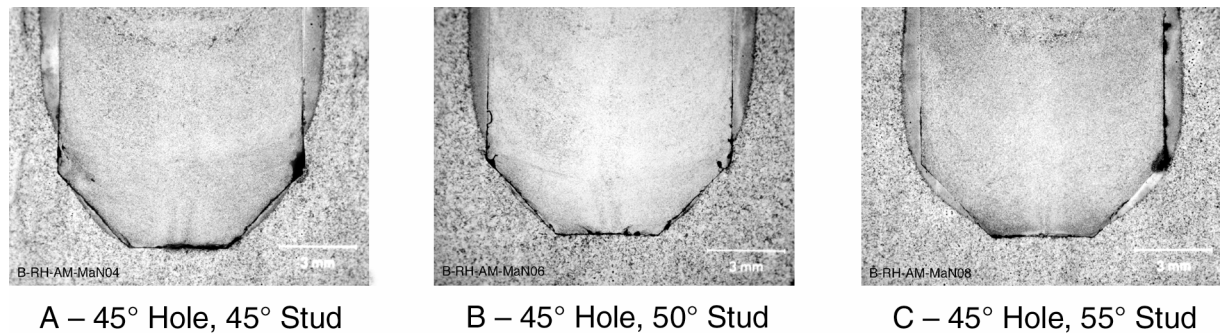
Macrographs of welds with chamfered hole and stud design, bottom area only.
